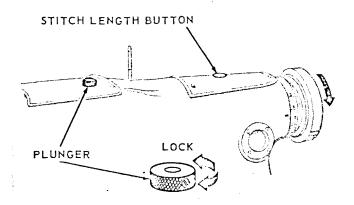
Regulating the Needle Feed and Drop Feed, Machines 281-22 and 281-24
